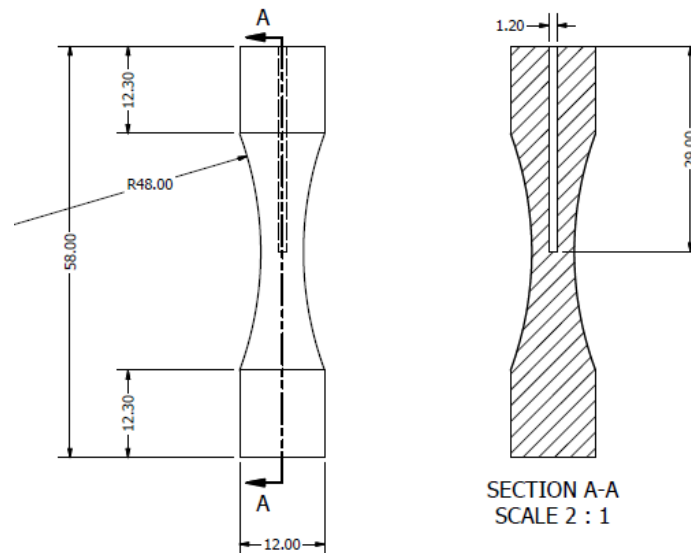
Hole position for thermocouple inserted in the specimen undergoing LST processing.
